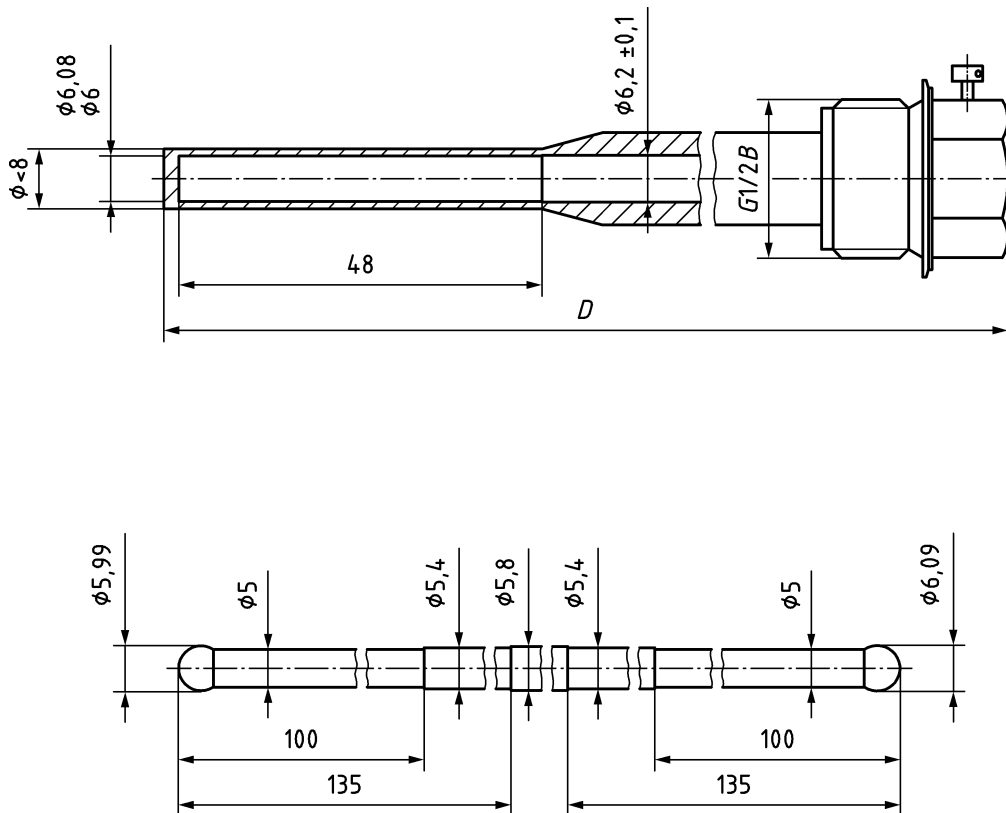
Suggested dimensions of gauge shown together with a pocket
